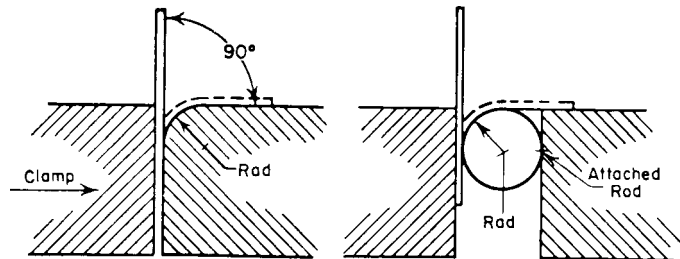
Methods for Clamping Specimen to Radius for Bend Test
